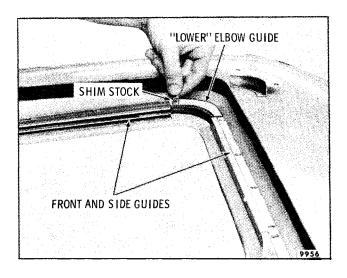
Shimming Lower Elbow Guide - E and K Styles
